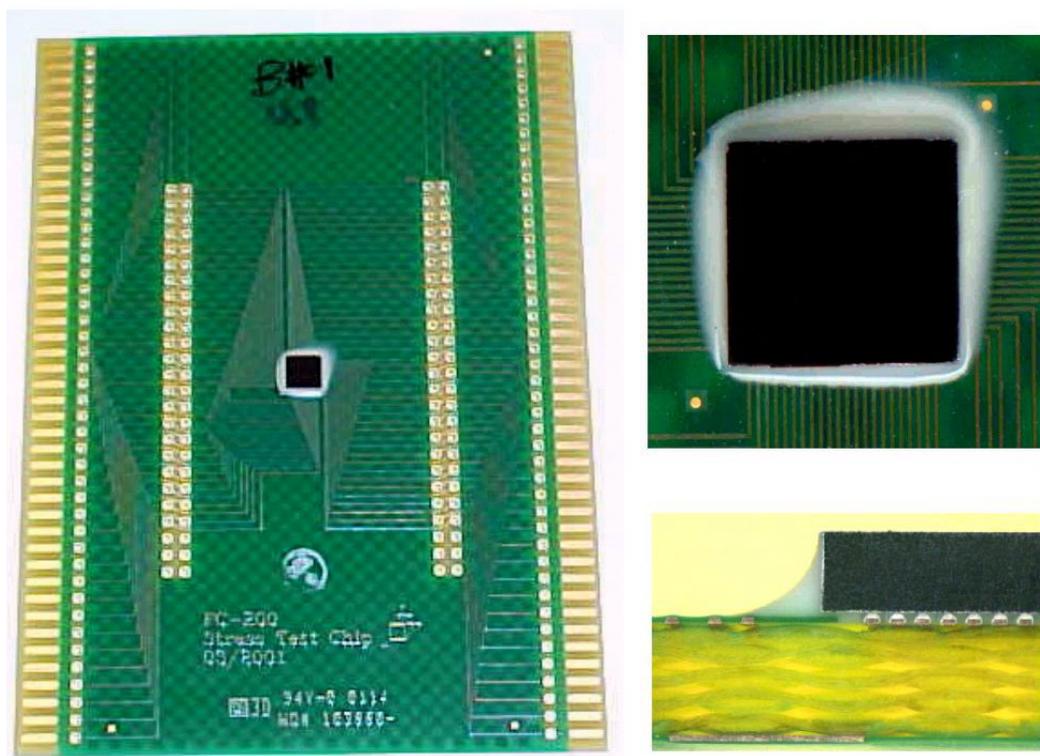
Flip Chip Assembly Incorporating Stress Test Chip
